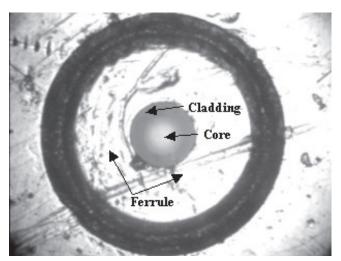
FOVIS 200X Inspection of Test Equipment FO Transmit Port
